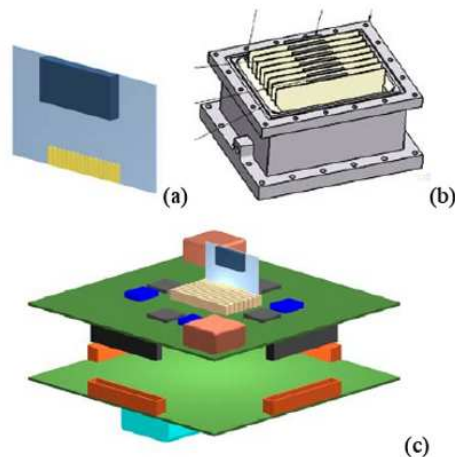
The 3D CZT prototype assembling scheme. (a) the CZT linear module; (b) the linear module packaging to form the detector unit; (c) a possible layout to assemble the detector unit with the AFEE (top green layer) and DHE (bottom green layer).
